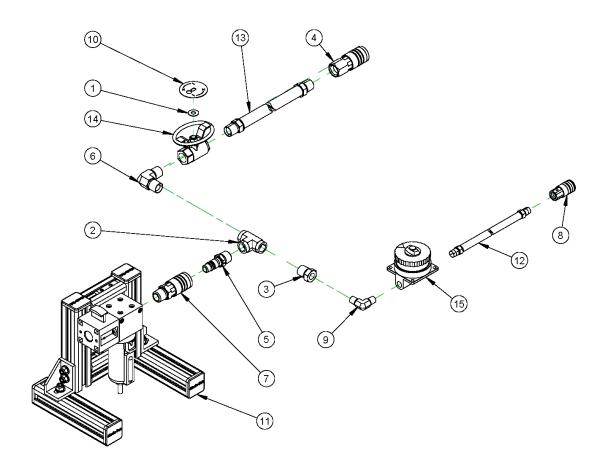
HYDRAULIC DRIVE ASSEMBLY (P/N 58180)
